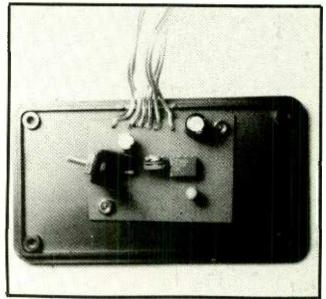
PC Board mounted on the bottom of the enclosure. A small section of the enclosure has been removed so that the wires will fit after the top of the enclosure has been fitted.
